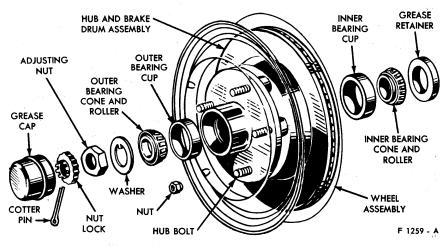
Front Hub and Rotor, Bearings, and Grease Retainer
